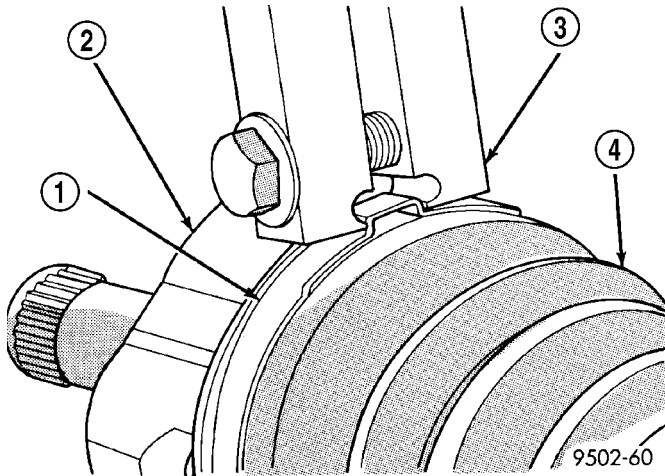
Crimping Tool Installed on Sealing Boot Clamp
